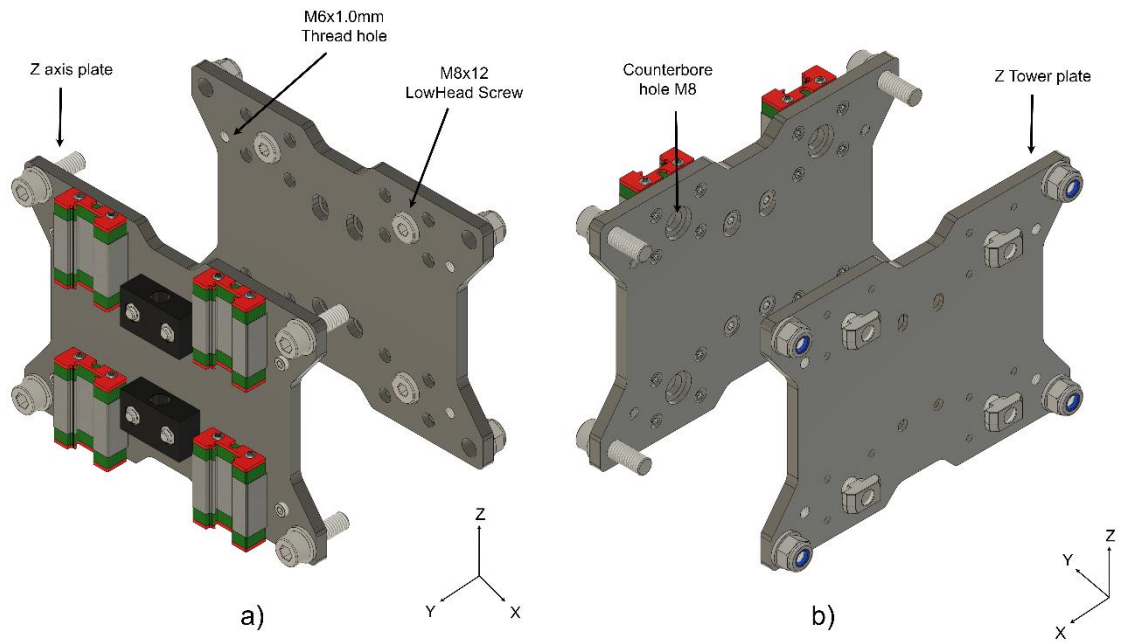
Z plates assembly, illustrating the Z axis plate side and the Z tower plate side. a) isometric front view of the Z plates assembly, b) isometric rear view of the Z plates assembly.
